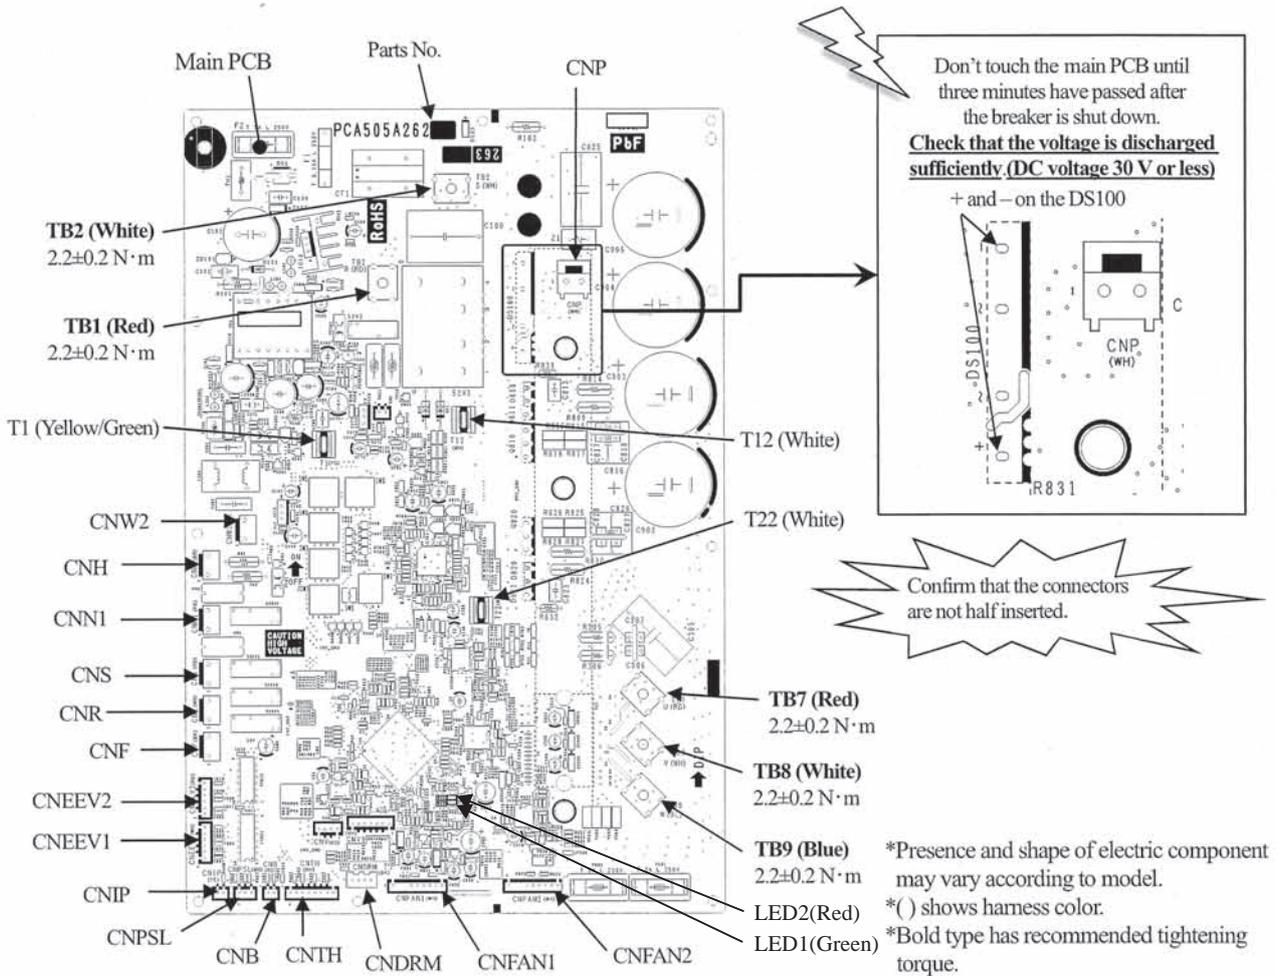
Parts arrangement view of main PCB and voltage measurement points
